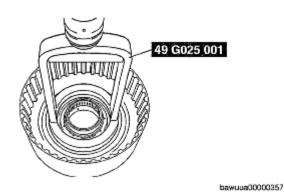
Placing SST On Clutch Balancer Courtesy of MAZDA MOTORS CORP.
